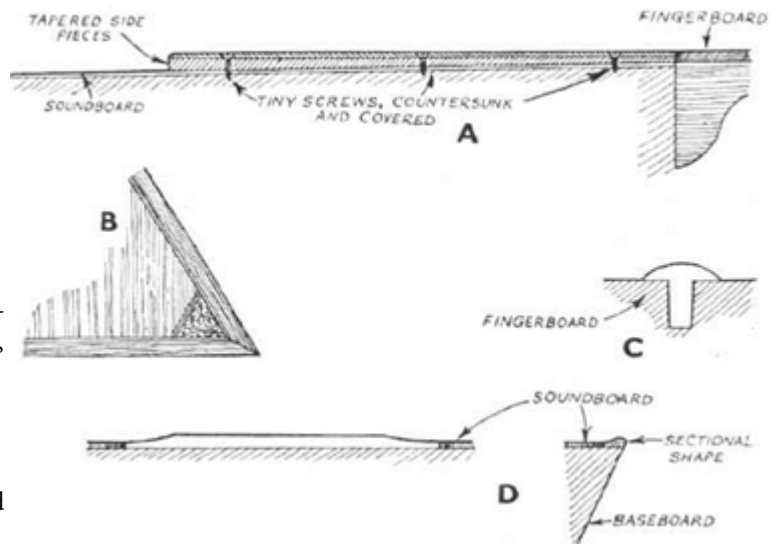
(A) SECTIONAL VIEW OF FIXING OF FINGERPLATE TO BODY (B) DETAIL OF CORNER DECORATION SHOWING VENEER LINES AND BINDING OF EDGES (C) CROSS-SECTION OF FRET WIRE (D) IVORY, BONE OR PLASTIC FITTING TO TAKE STRING PRESSURE ON LOWER EDGE.
